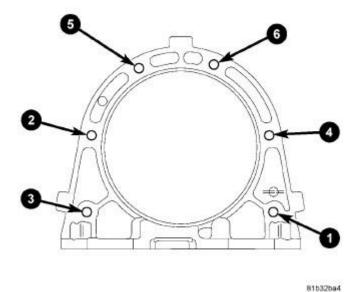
REAR COVER TORQUE Courtesy of CHRYSLER LLC
